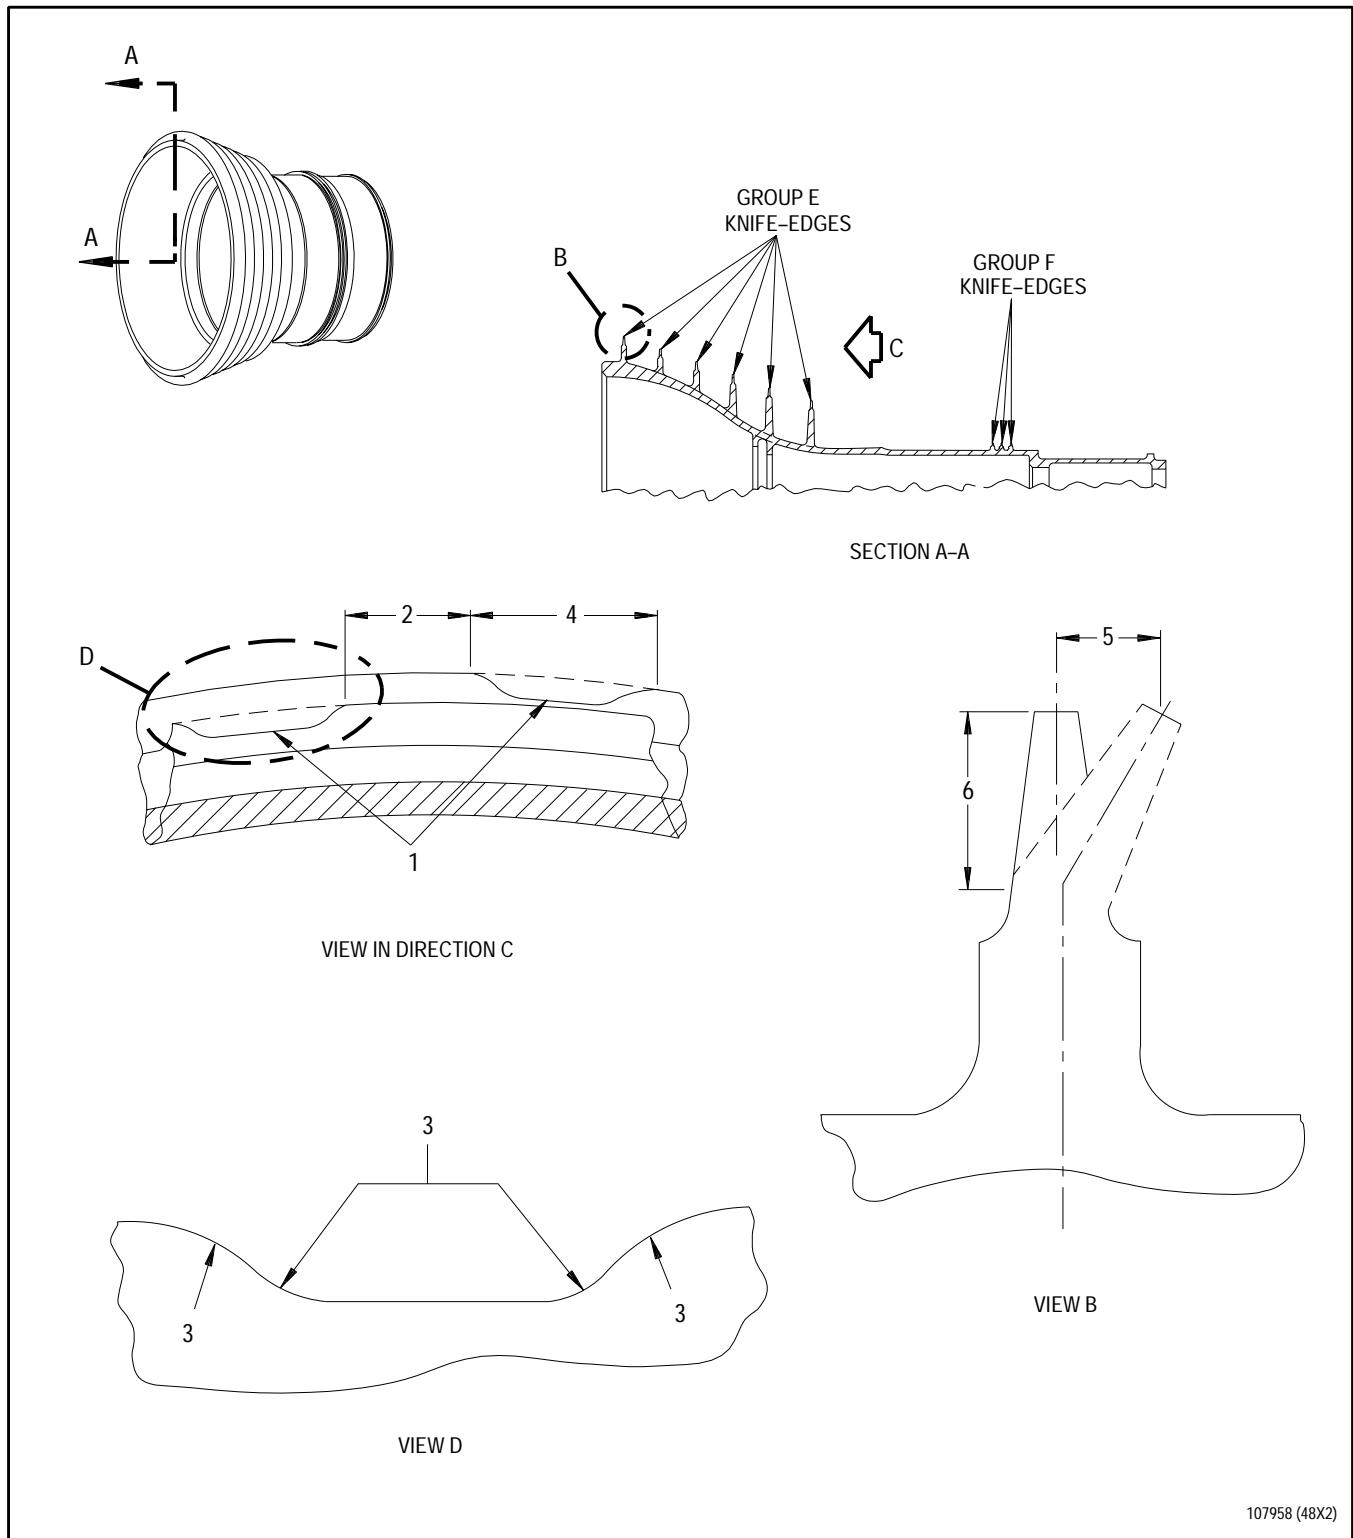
No. 4 Bearing Front Air Seal - Knife-Edge Blend Repair
